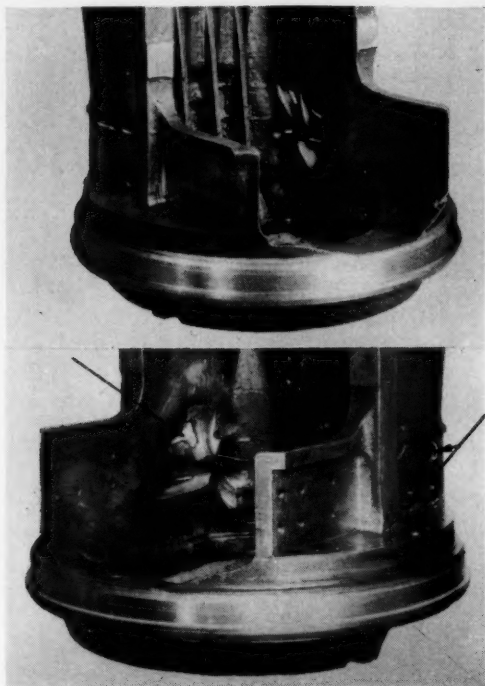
(A) CARRIAGE CASTING FOR 5-INCH 38 CALIBER GUN. DEFECTIVE AREAS HAVE BEEN REMOVED.
